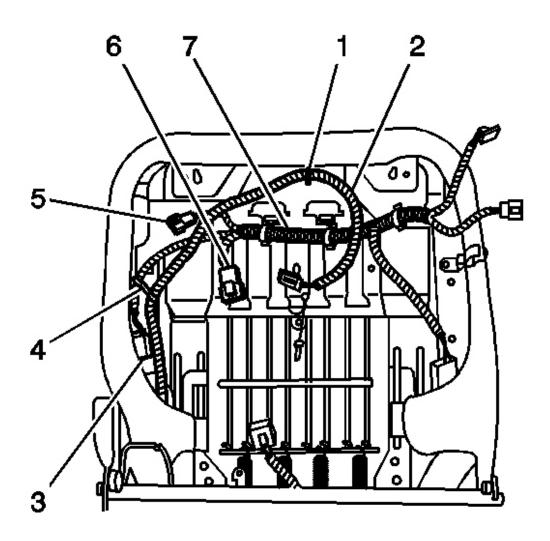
Identifying Connectors & Harness Courtesy of GENERAL MOTORS CORP.
